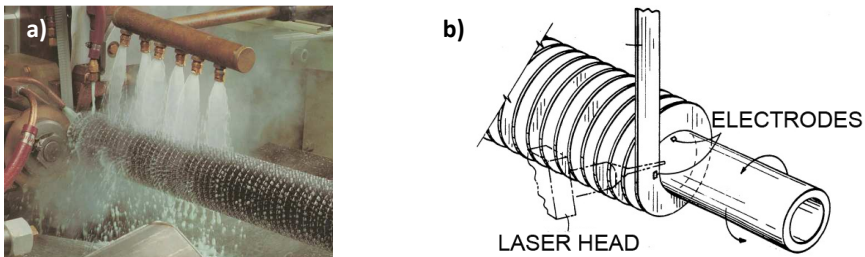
High frequency welding of finned tubes [22] (a); laser assisted high frequency welding [21] (b)
